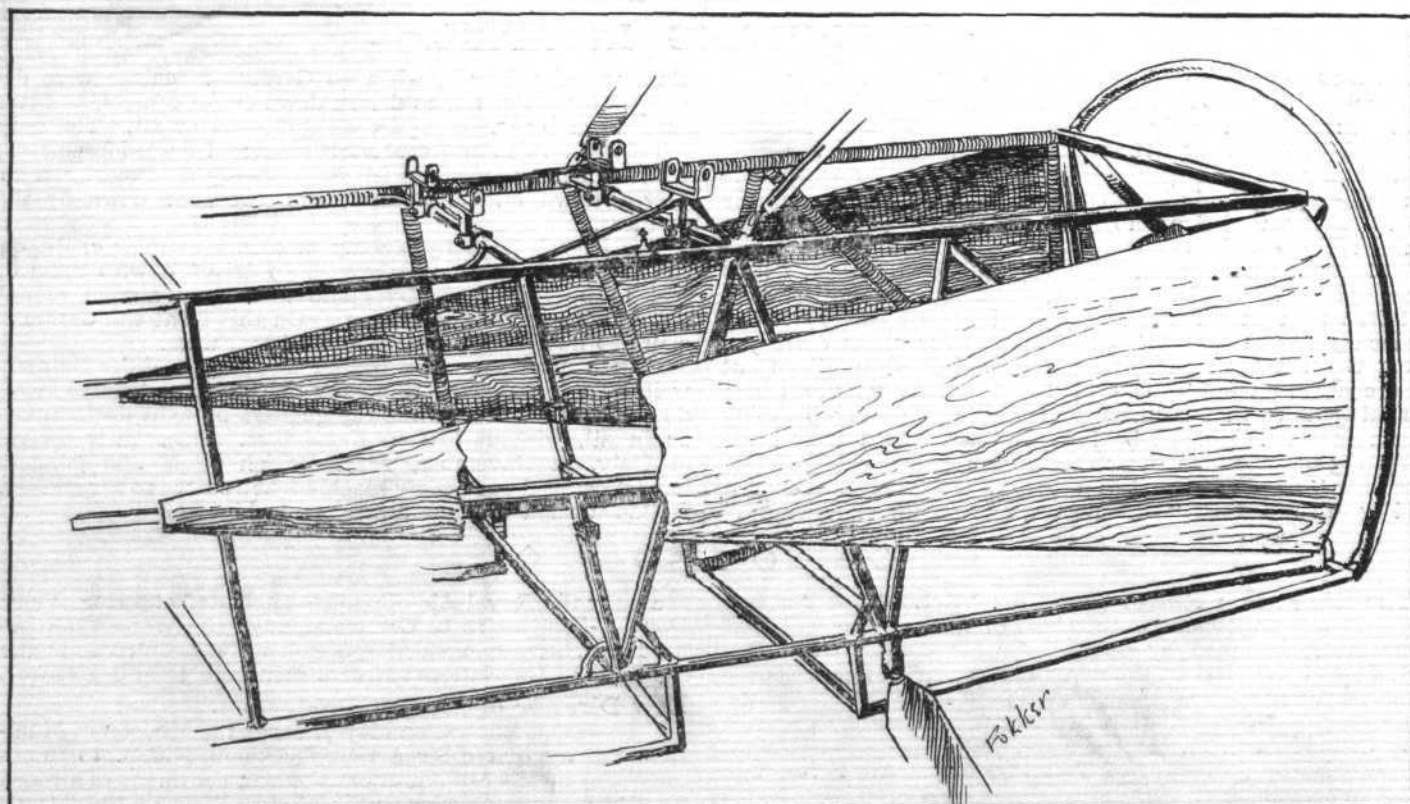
Sketch showing the three-ply fairings and their attachment on the Fokker triplane. The fork end brackets for the two machine guns should be noted.
